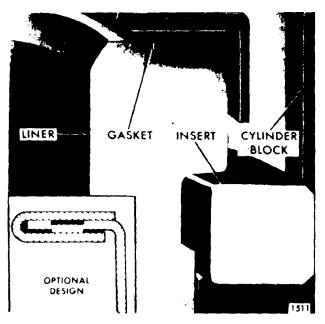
B-35. Compression Gasket Mounting in Cylinder Block
